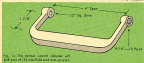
This torque wrench adapter will pull your 8125 manifold stud nuts up right.
